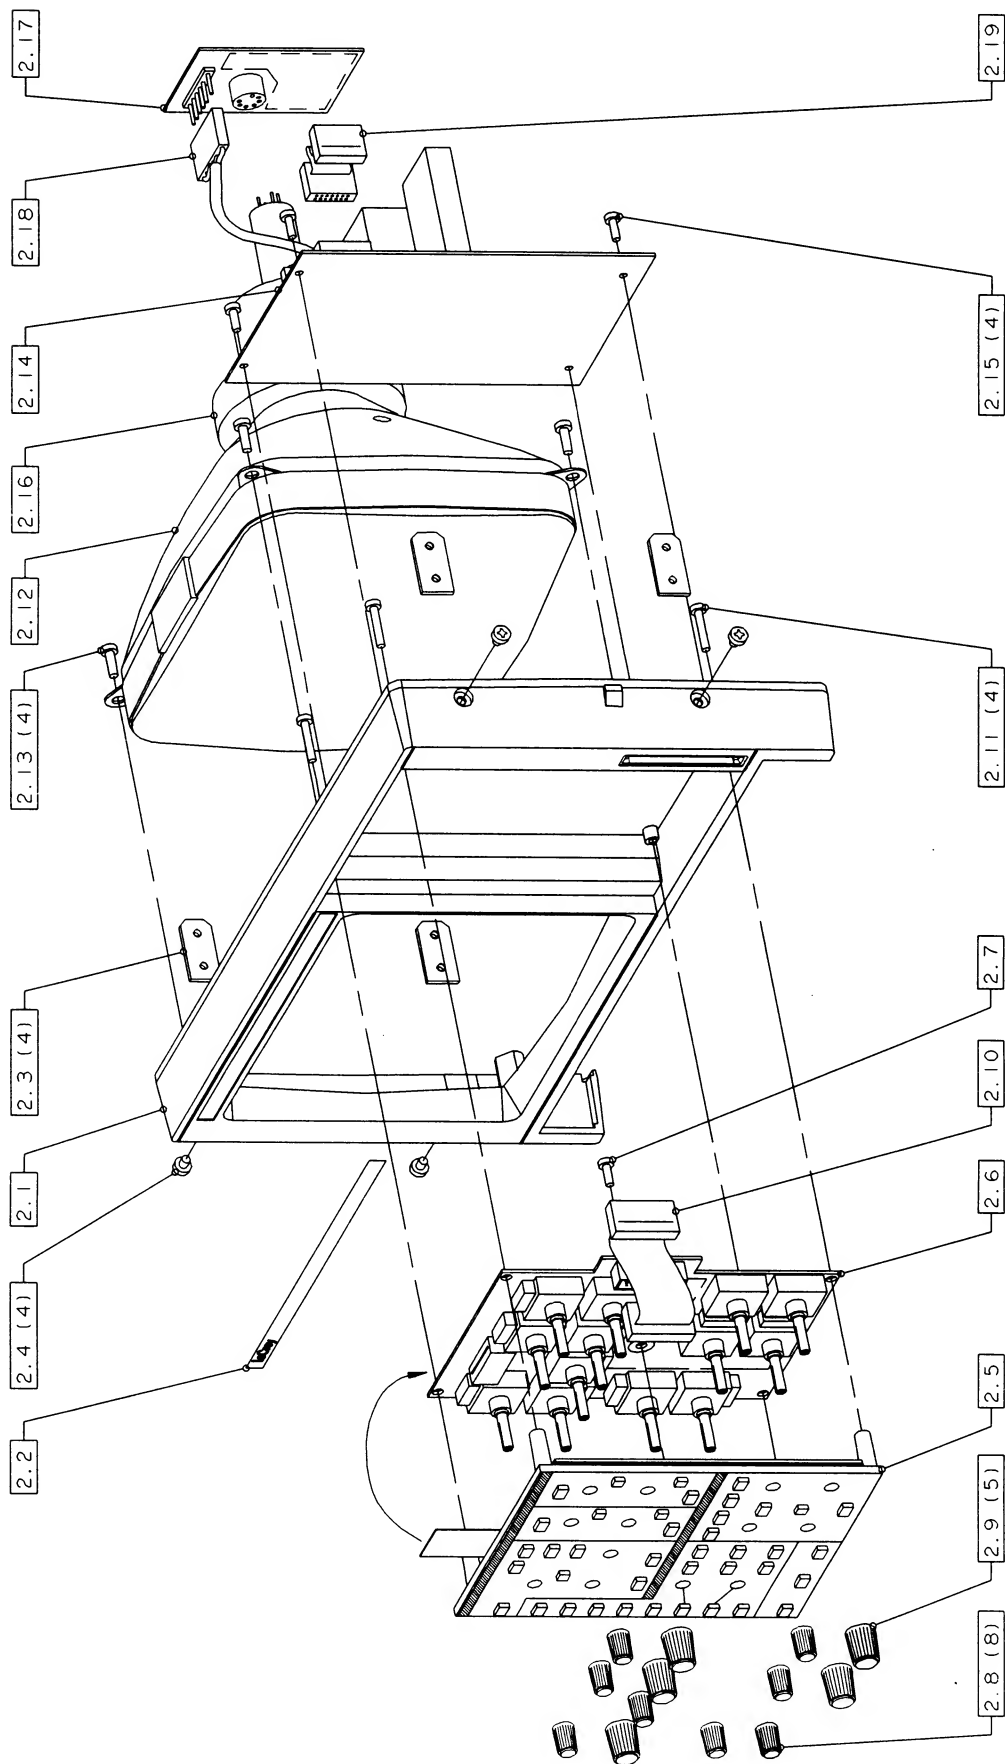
9320 FRONT FRAME EXPLODED VIEW
